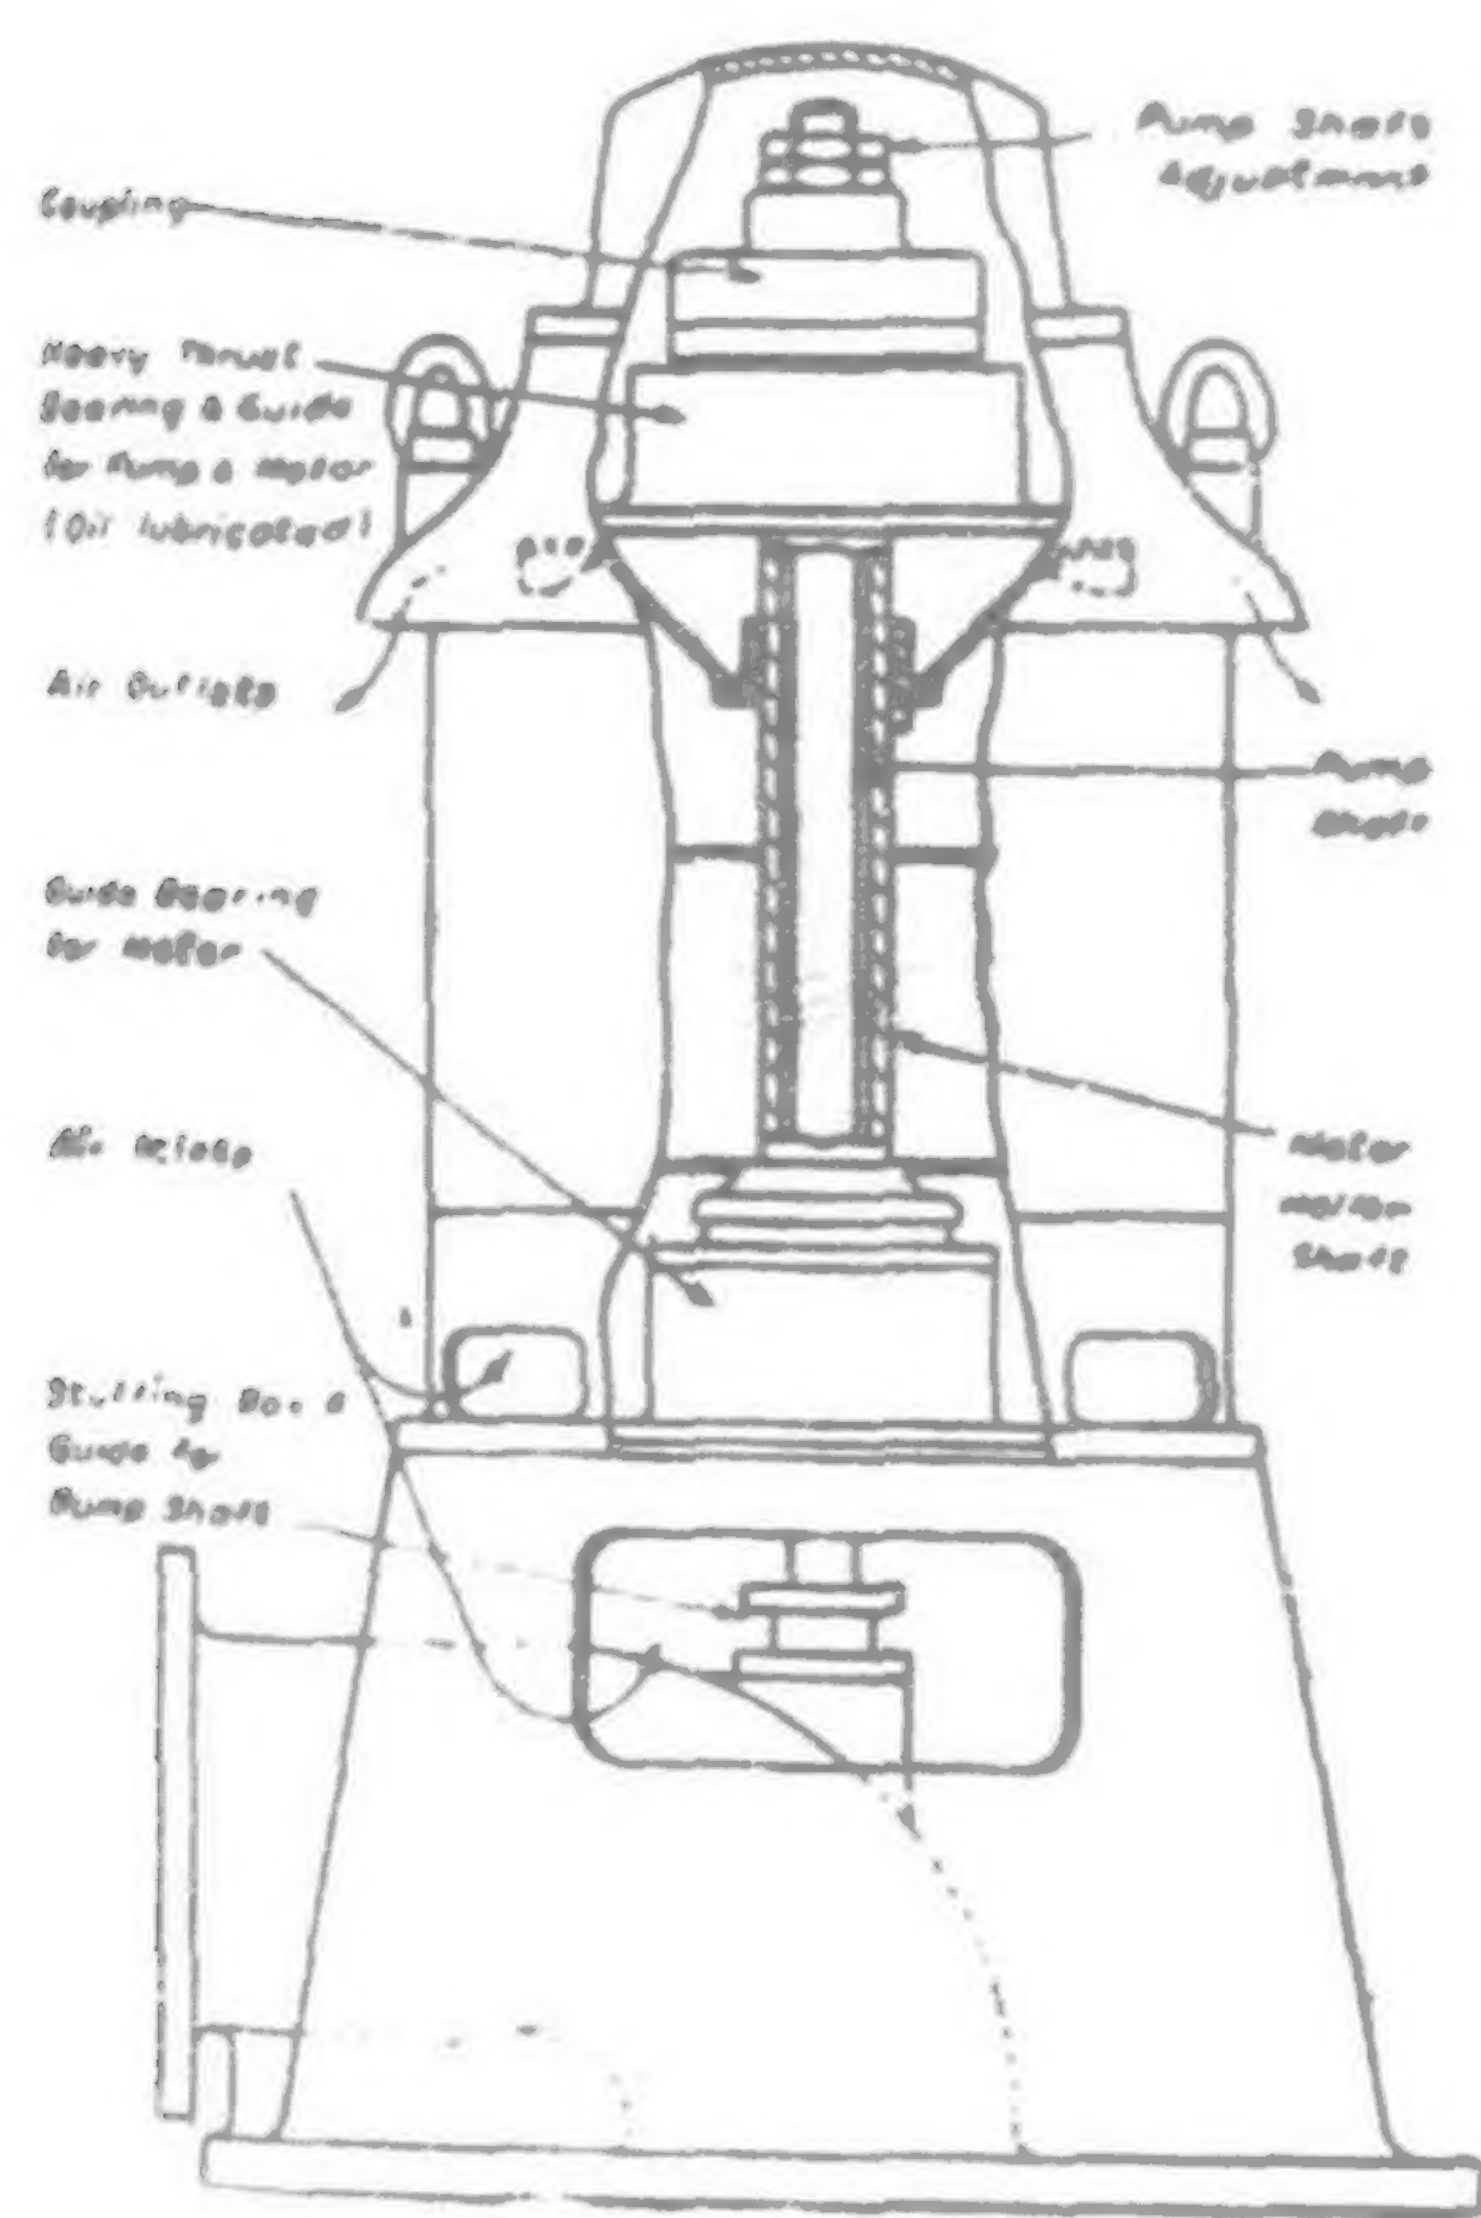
Arrangement of 50 h.p., 1,500 r.p.m. Hollow Shaft Motor on Pump Head
